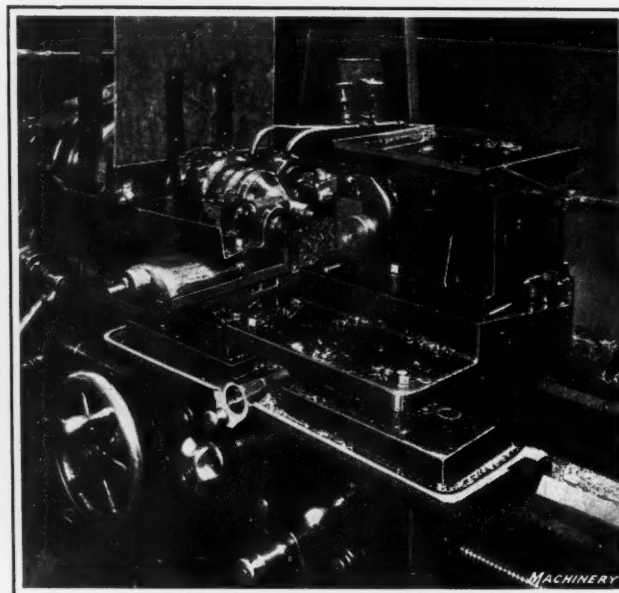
Set-up of Lathe for turning Outside of Shell, using Special Turning Attachment
